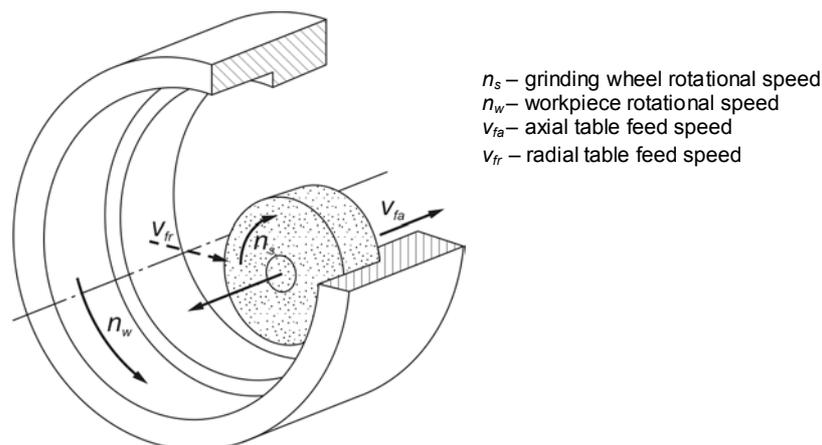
Multi-pass peripheral axial internal cylindrical grinding process
